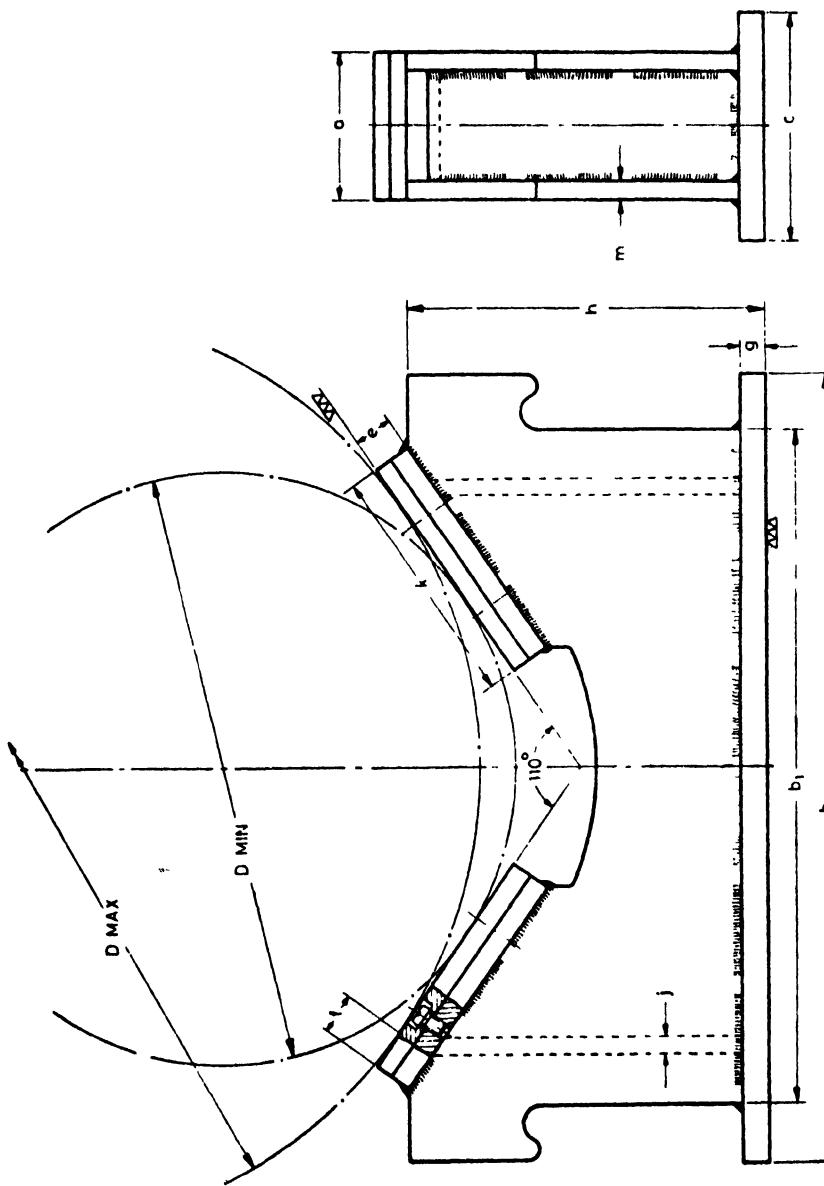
DIMENSIONS FOR V-BLOCKS, SIZES 1400 AND 2000 mm
